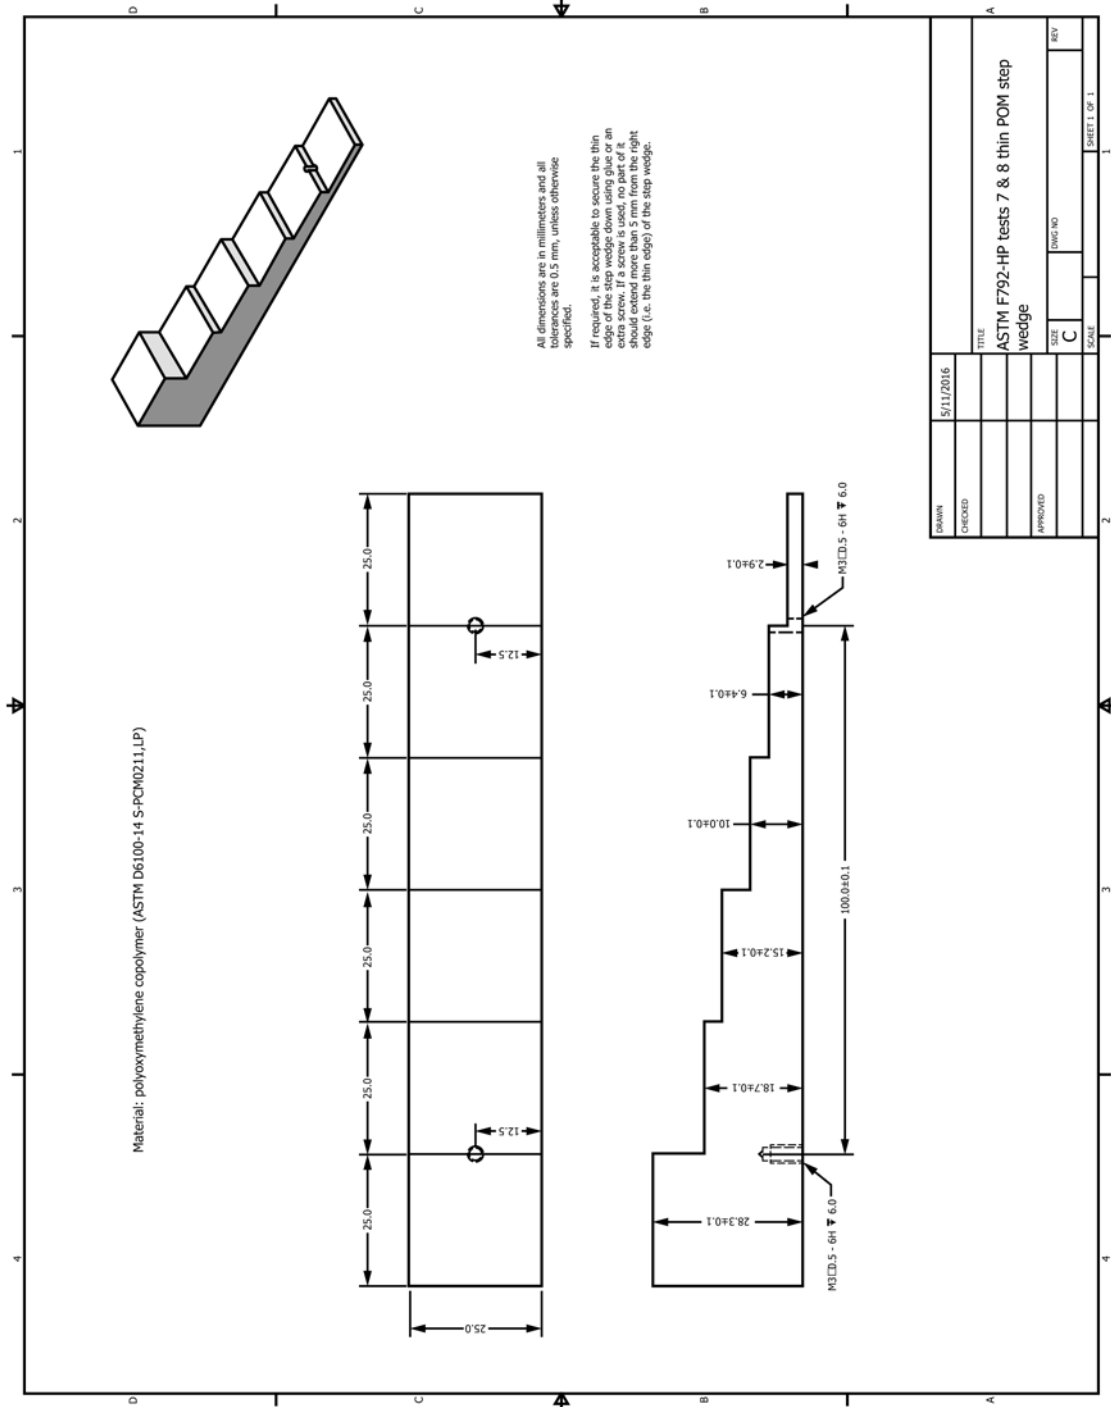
Practice F792 - HP Mechanical Drawing
